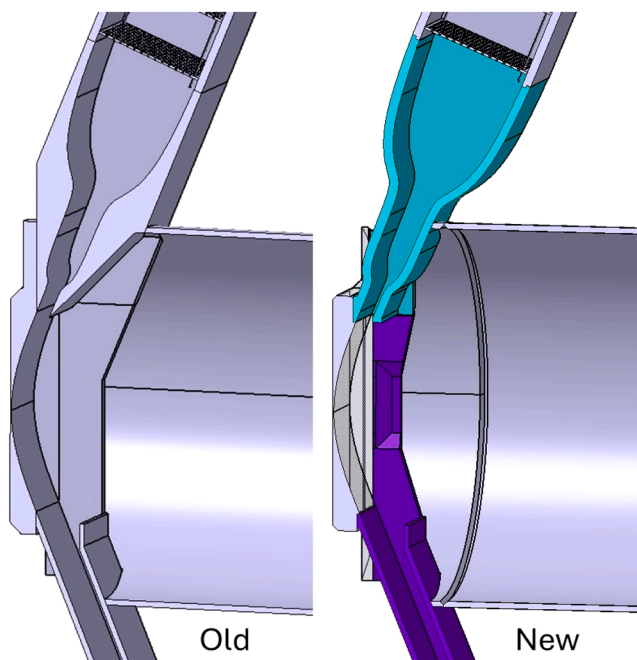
Target Assembly (Nozzle-Backplate-Outlet Channel assembly) 3D official CAD model(left)-and new proposal (right)- section view.
